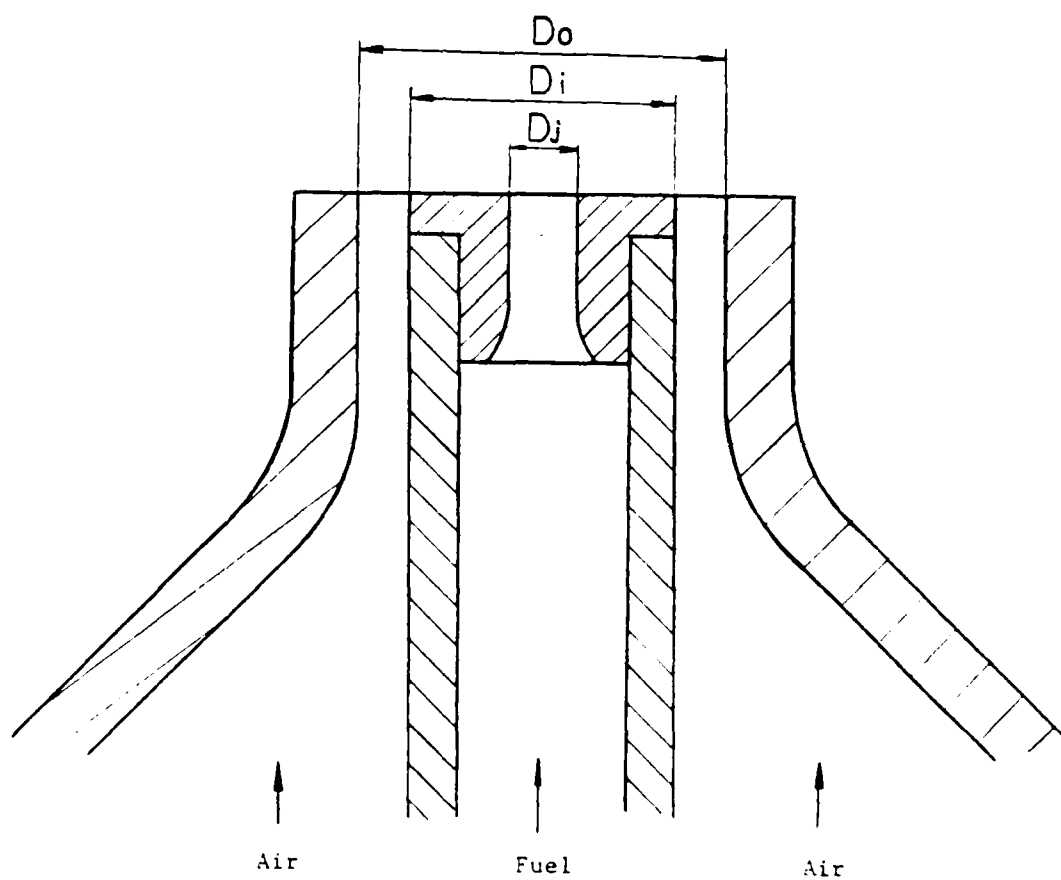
Schematic drawing of fuel and air nozzles used in Test 1.
